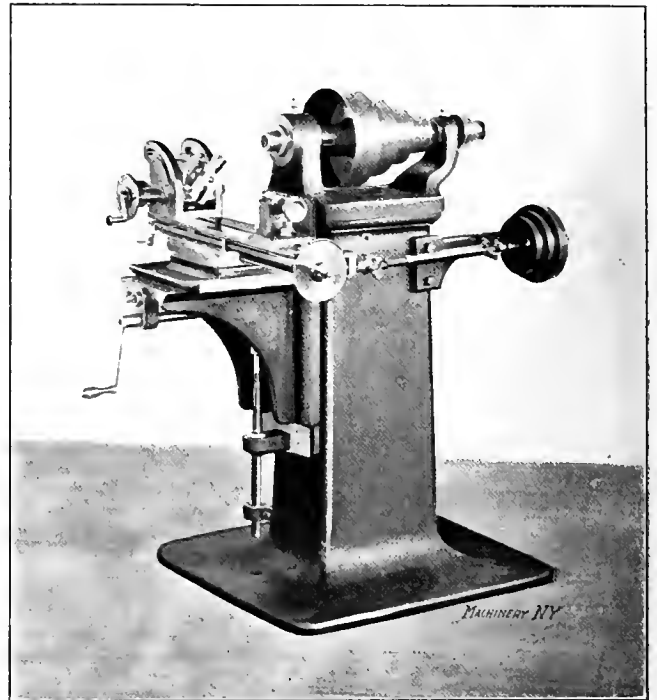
First Universal Milling Machine. Built about 1865 by Joseph R. Brown, of Brown & Sharpe Mfg. Co.
